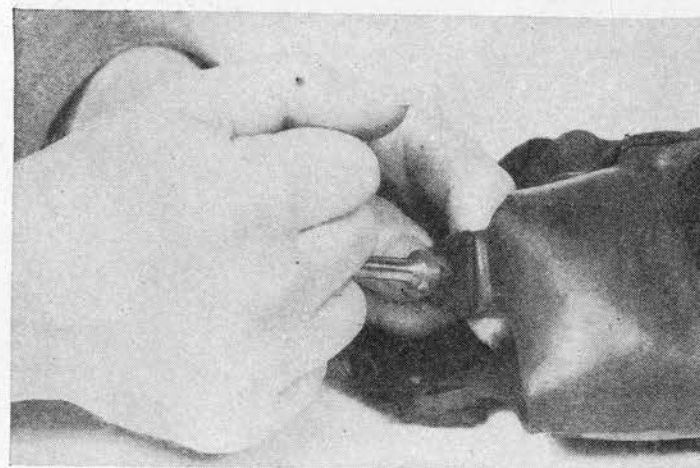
Reaming out end of shank of rivet button with countersink.
